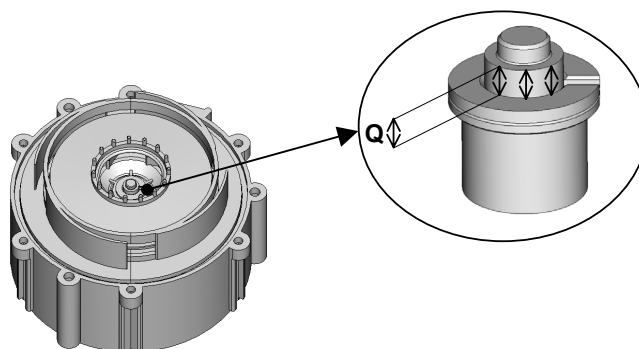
F – Correct alignment sub-assembly impeller - shaft
